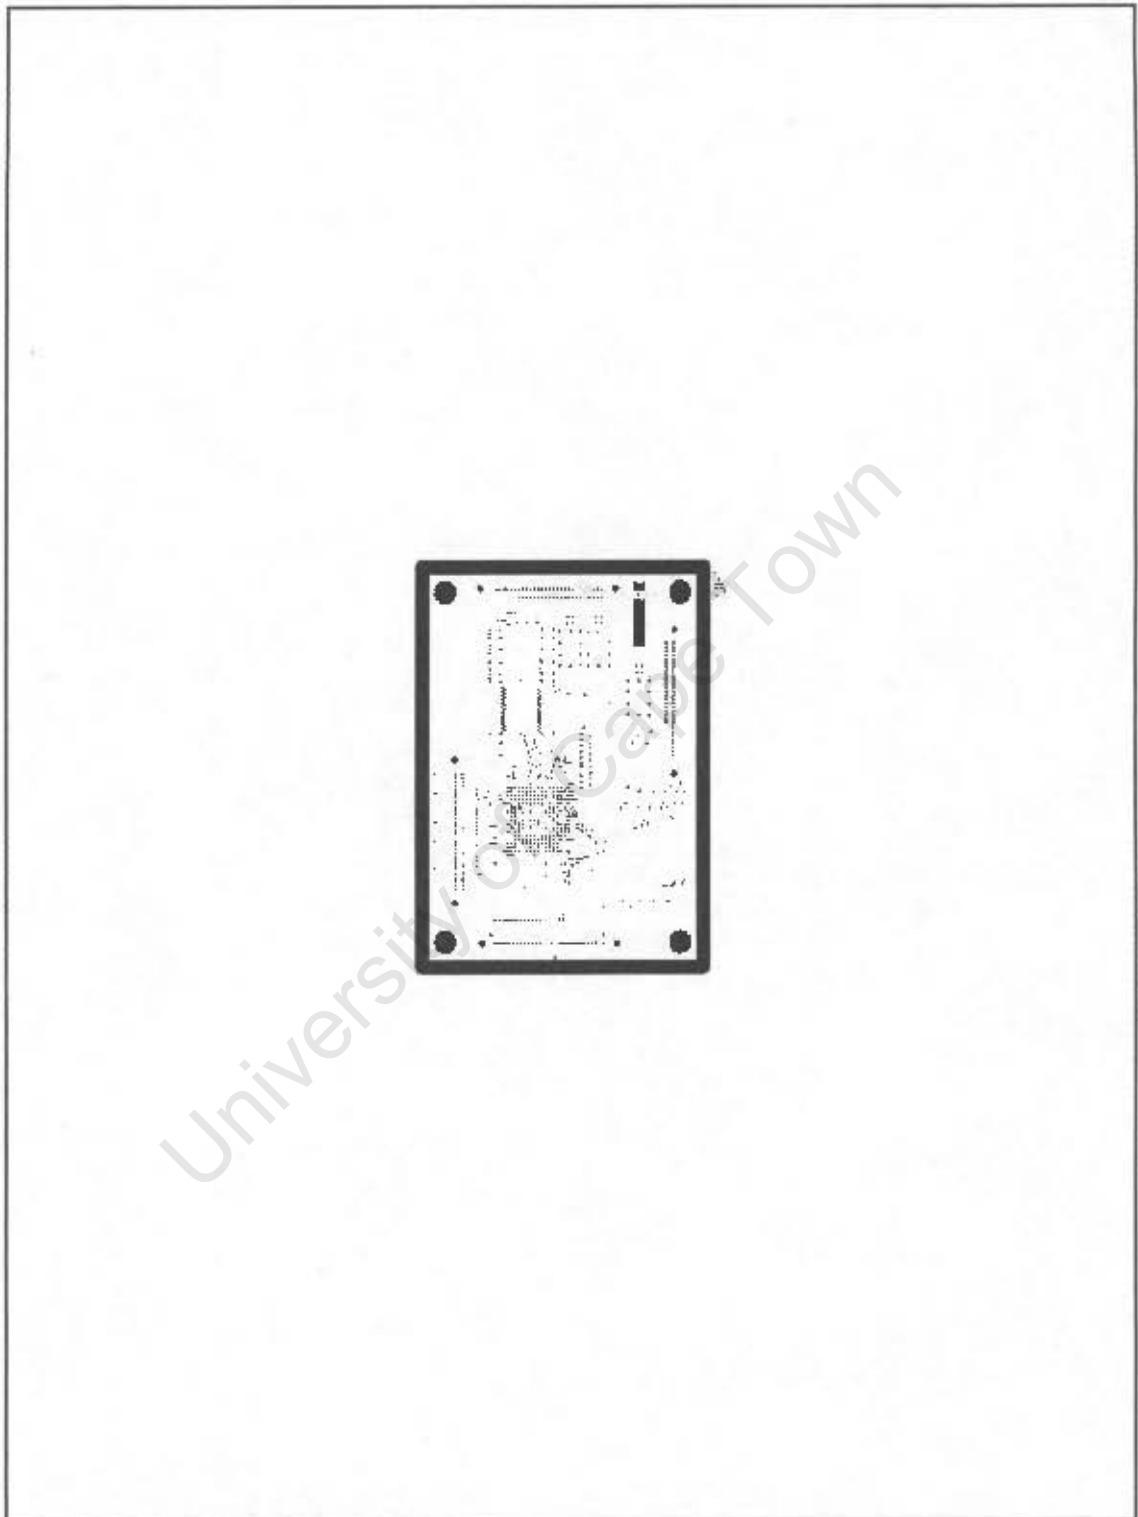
RUI Module PCB Layout -1 3.3V Supply Plane
